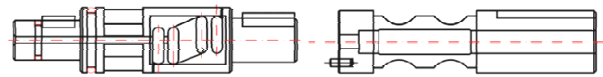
Shapes of force sensors measuring thrust-torque of a propeller and thrust of duct for a bevel gear type azimuth thruster
